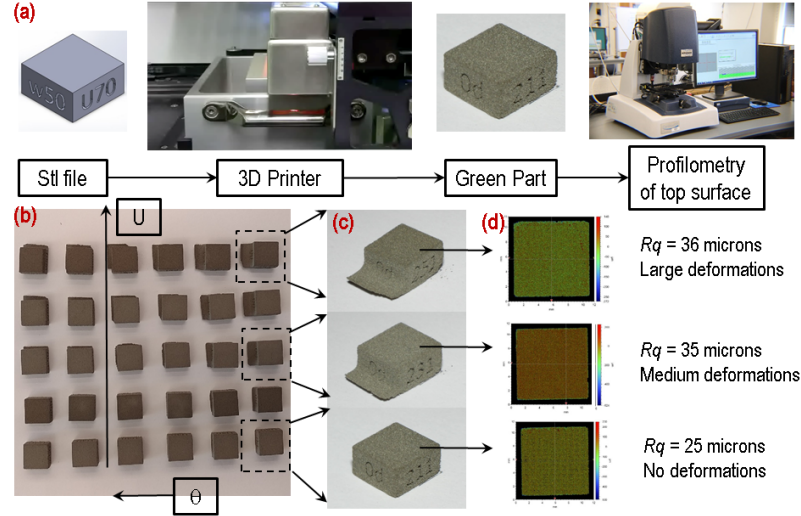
(a) In the 3D printing process, a CAD file (e.g., a cuboid) of the 3D geometry is input to the 3D printer. The printer directly produces the ‘green’ solid part. In the case of binder jet printing the ‘green’ part is pre-sintering. (b) A battery of spreading and printing experiments are conducted where parameters such as the linear speed of spreader U , and rotational speed ω (not shown) and orientation of the cuboid θ with respect to spreader's linear speed are varied and extracted for inspection. (c) and (d) Final part inspection. Extracted parts from the printer bed are inspected using surface metrology (e.g., roughness) and microscopy (e.g., porosity, shape defects).
